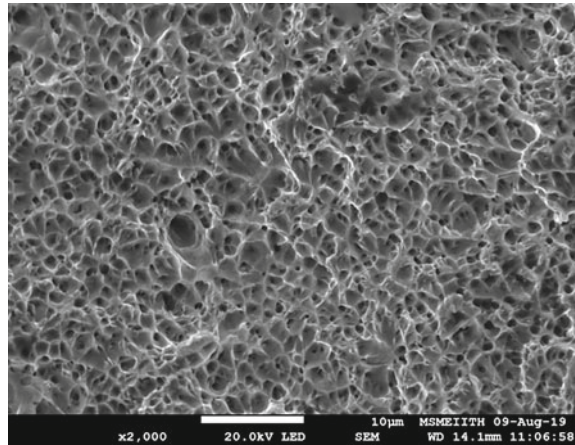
Fractography of the tensile tested specimens of AM350-SA
